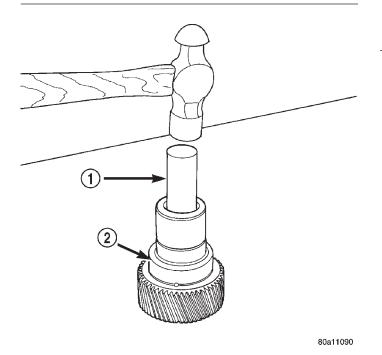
Remove Input Gear Pilot Bearing 1 – DRIFT 2 – INPUT GEAR
